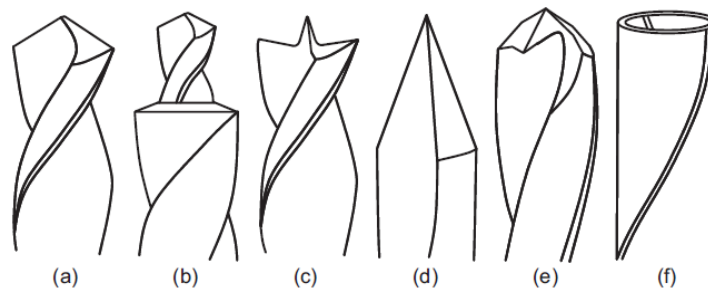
Schematic of special drill bit geometries: a) standard twist drill; b) step drill; c) W-shape drill; d) straight flute drill; e) multifaceted drill; f) core drill. After [18]
